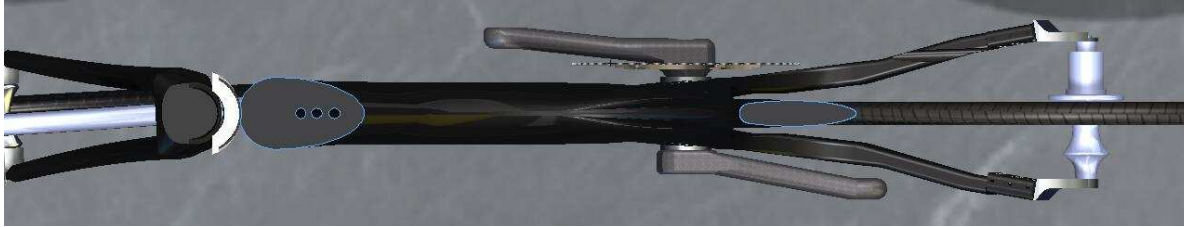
Cross Section Illustrating Pink Foam Core and Internal Cable Routing
